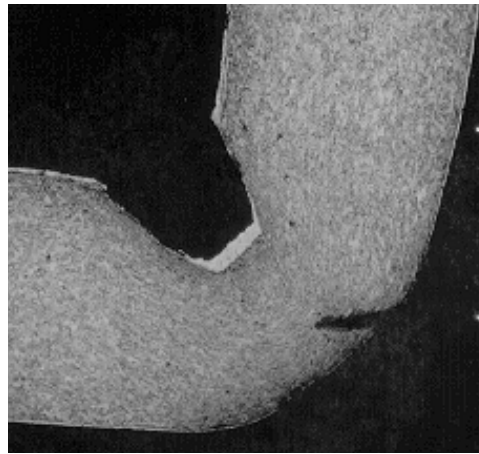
Failure of a Bend Created in a Press Using a Score Line to Locate the Bend
